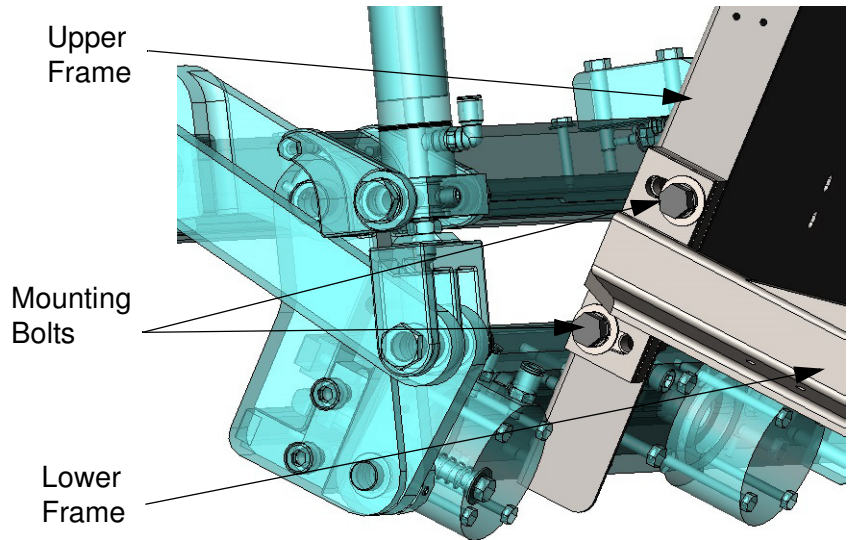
Upper Frame Mount (pivot guard removed for clarity)
